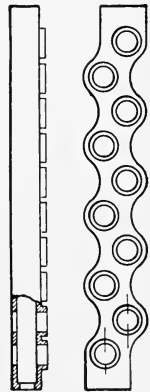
Details of Header—Babcock & Wilcox Boiler.
